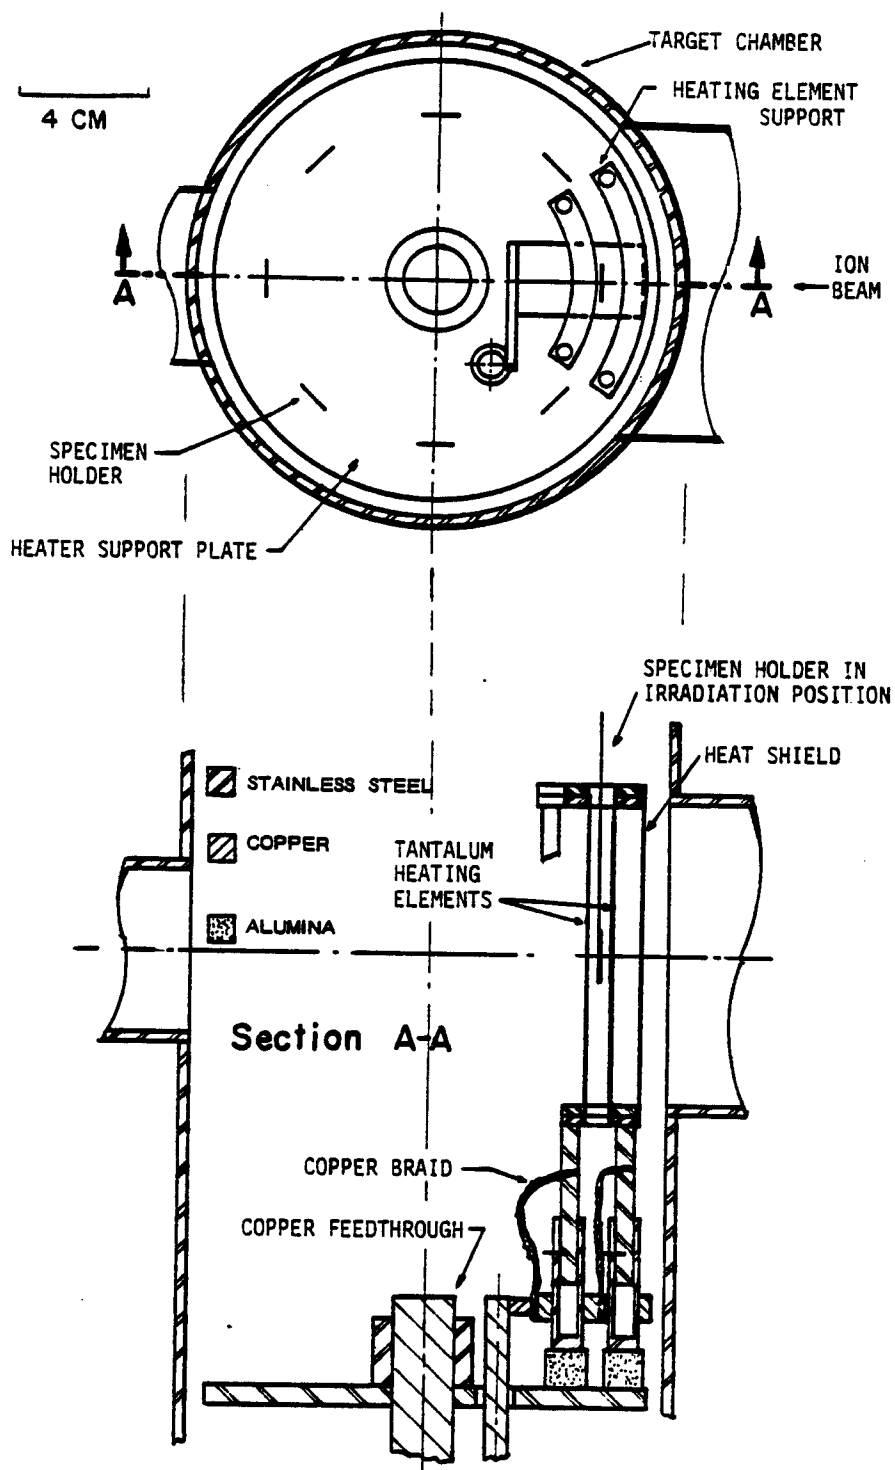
Drawing showing top and cross sectional views of the specimen heater.
